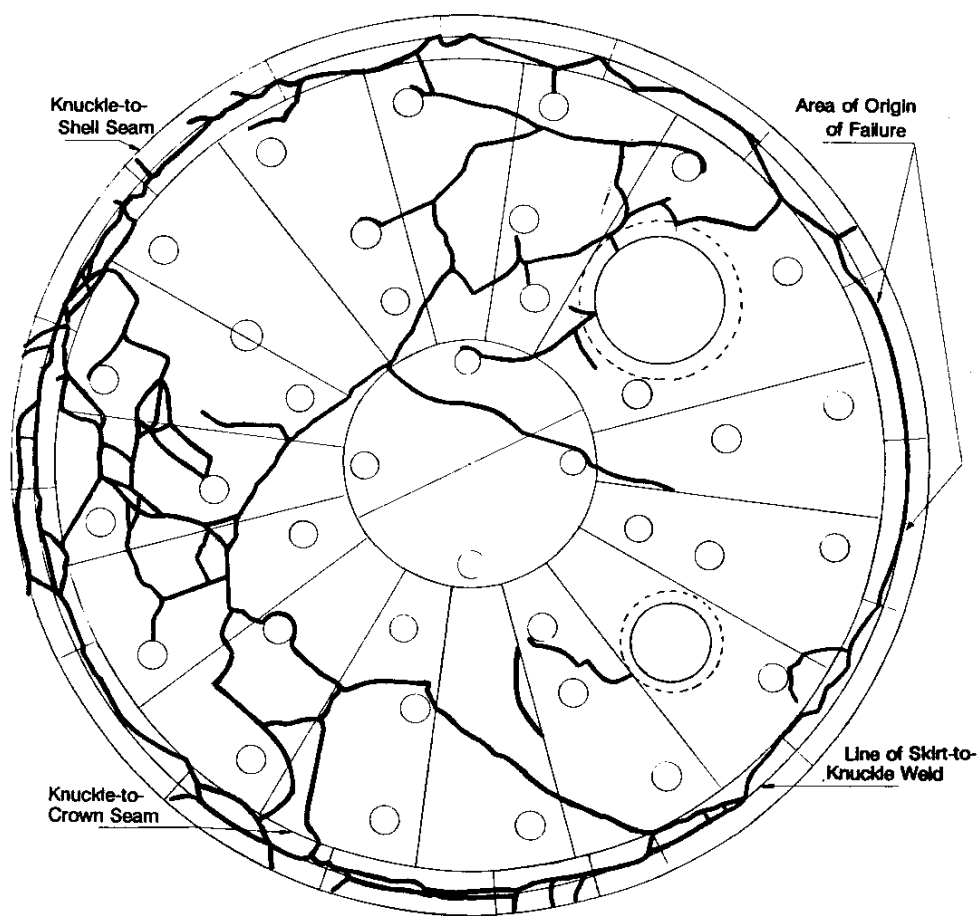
Layout of failed bottom head showing 34-piece construction and brittle fracture lines.<sup>3</sup>
